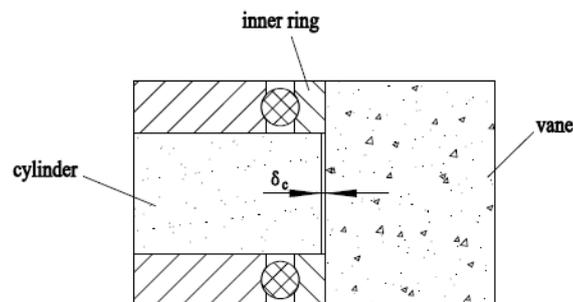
Assembly of the vane tip with cylinder and rolling bearing
